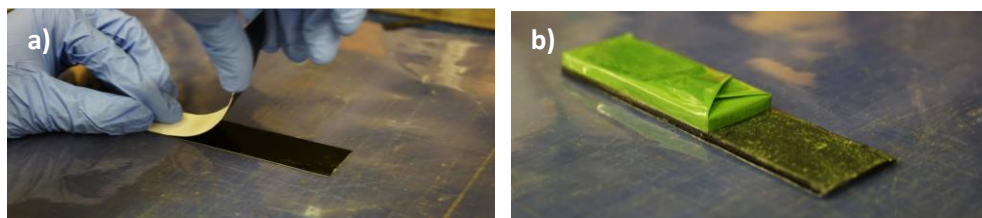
Image of: a) process of stacking CFRC, b) final assembly before vacuum bagging
